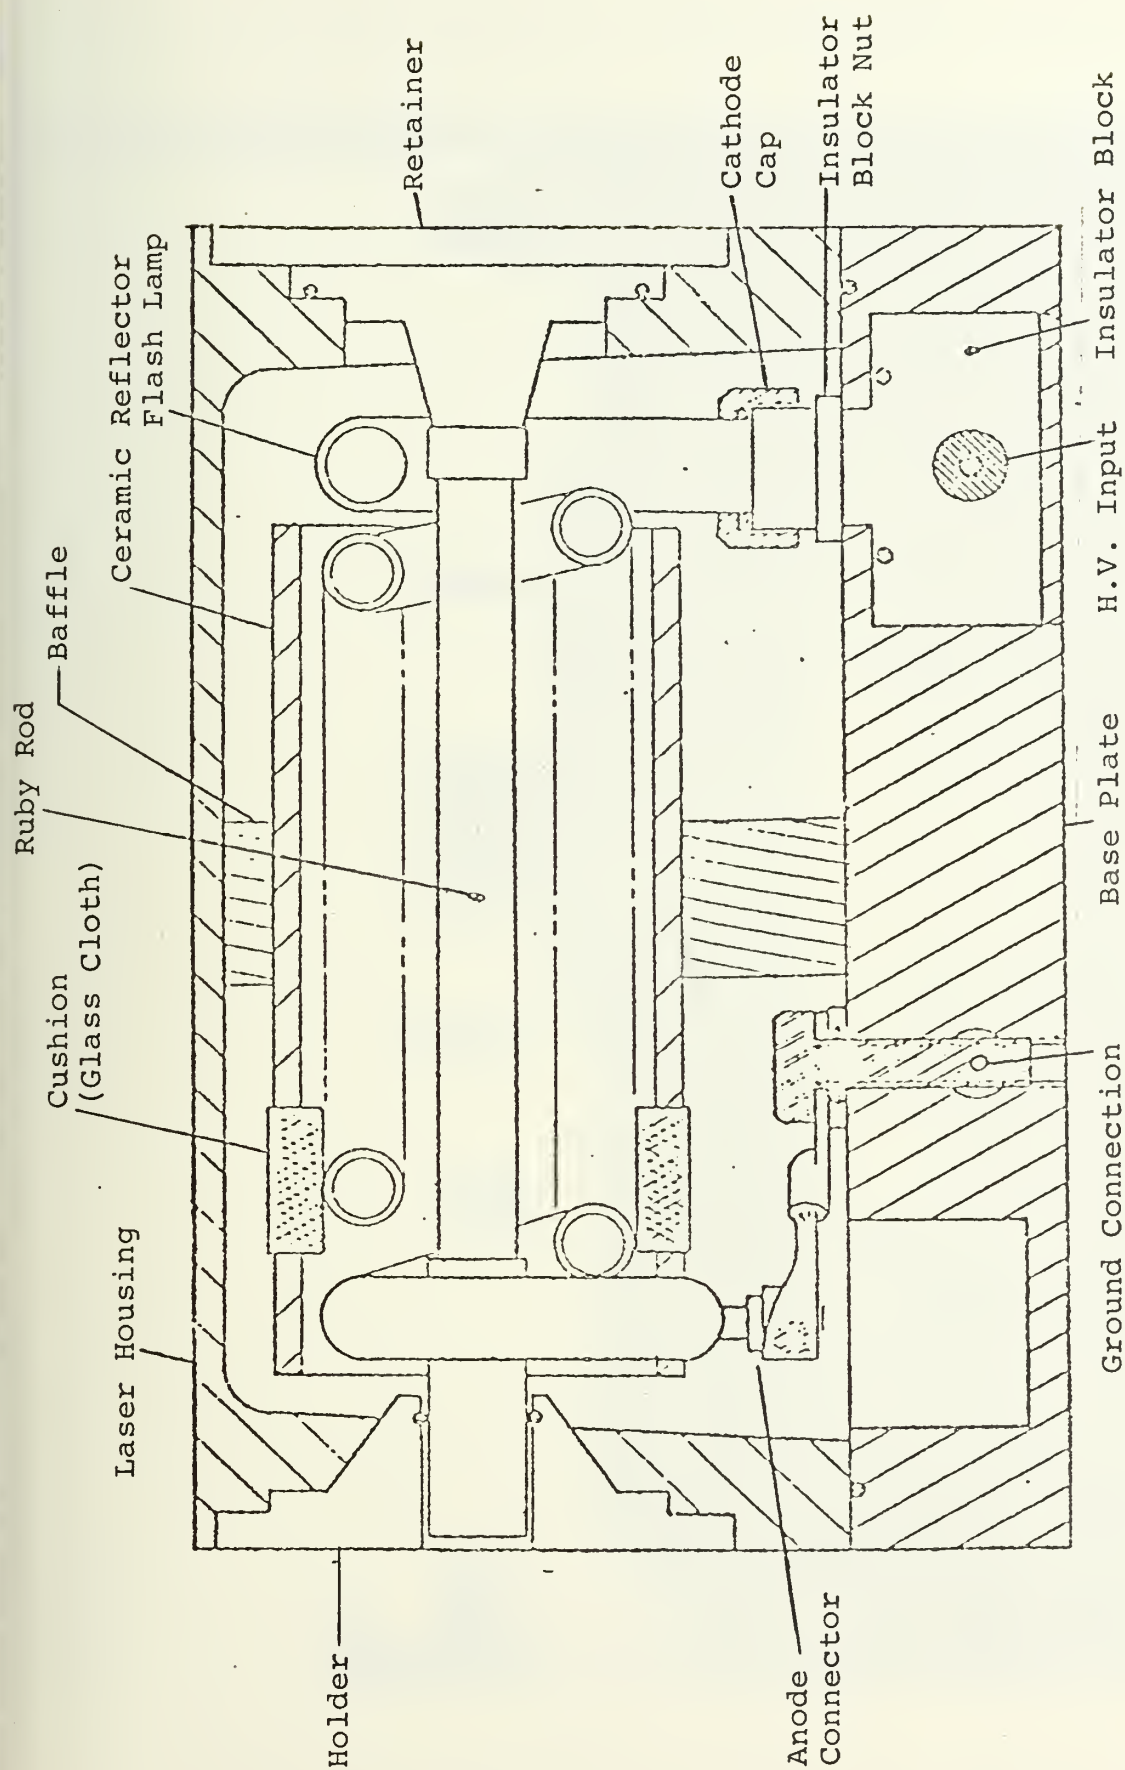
K-1 LASER HEAD - INTERNAL VIEW
